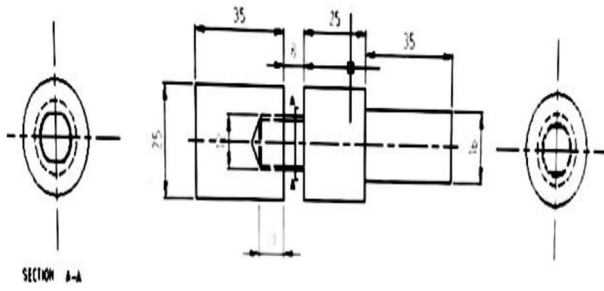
, b: Drow threaded cylindrical with 2 flat surfaces
